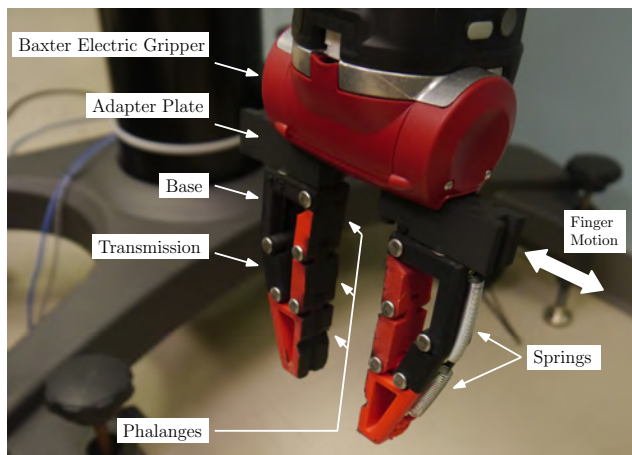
Prototype of adaptive fingers mounted on the electric gripper of a Baxter robot
